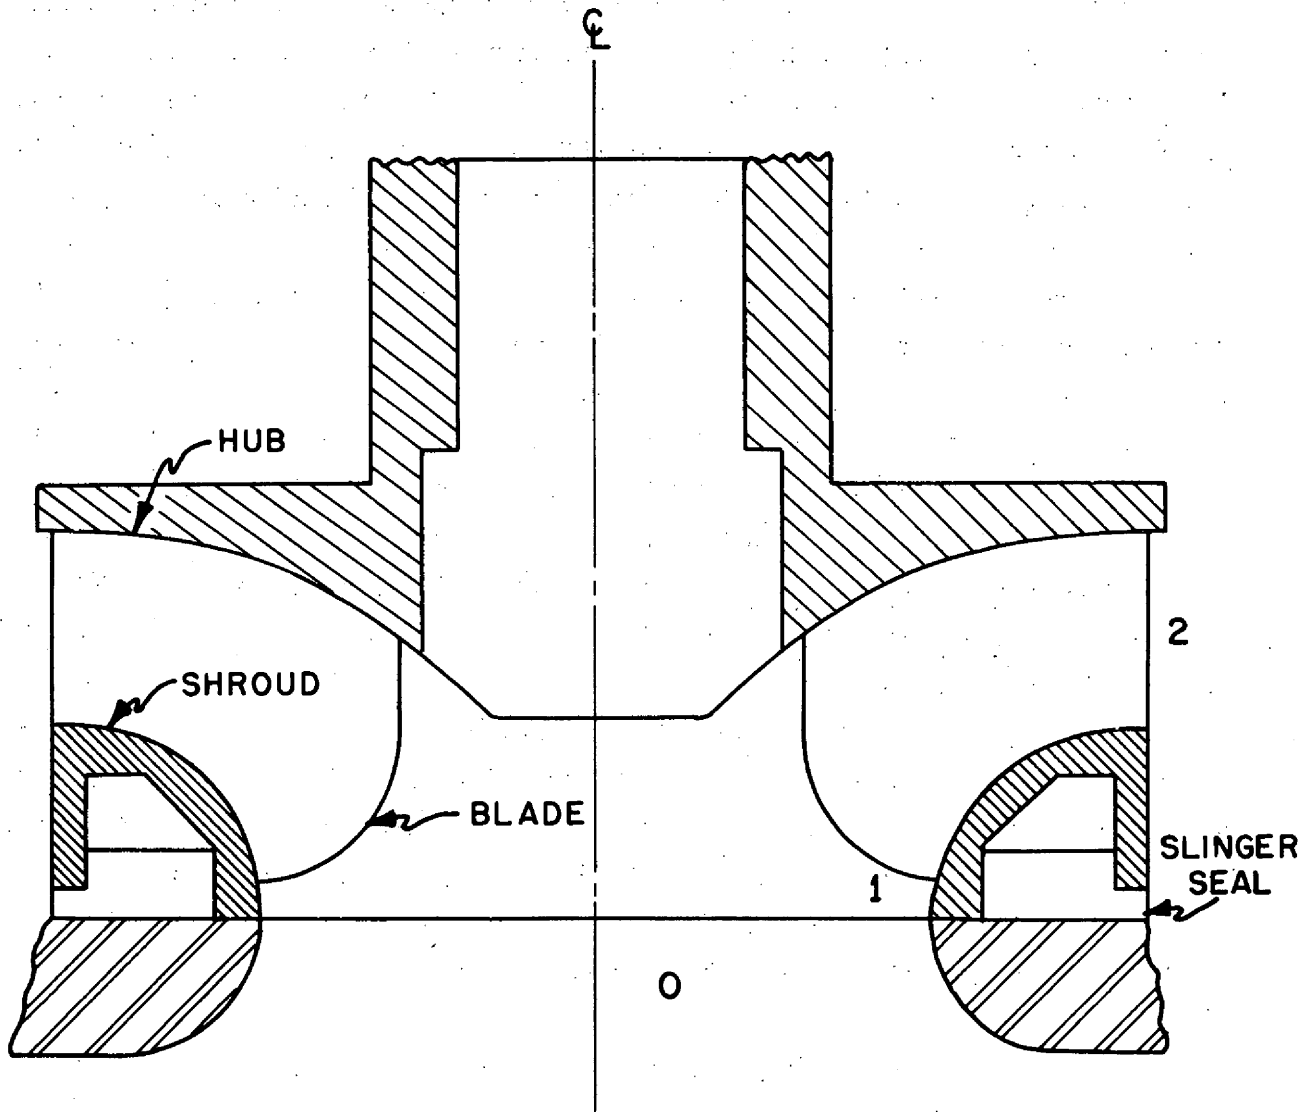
BRASS ART FUEL PUMP IMPELLER
